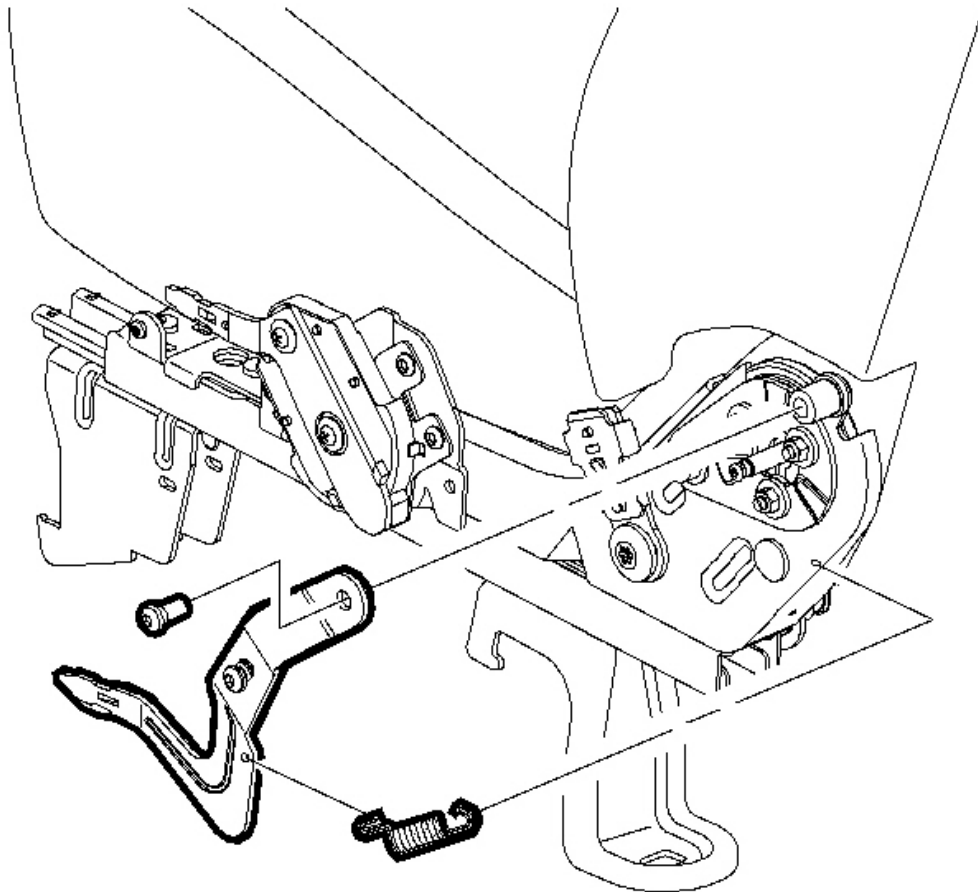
Removing/Installing Recliner Handle Bolt & Spring
